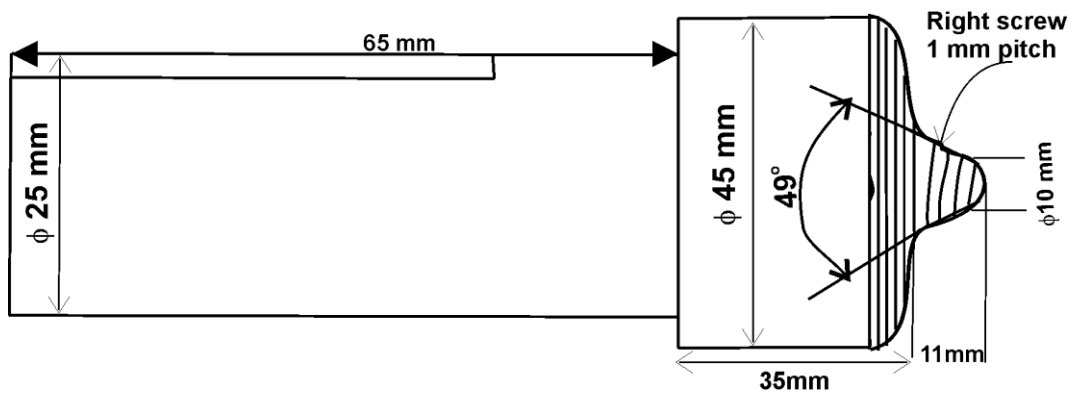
Illustrates the profile and dimensions of the PcBN tool employed for 12 mm thick INRAFM steel plate.
